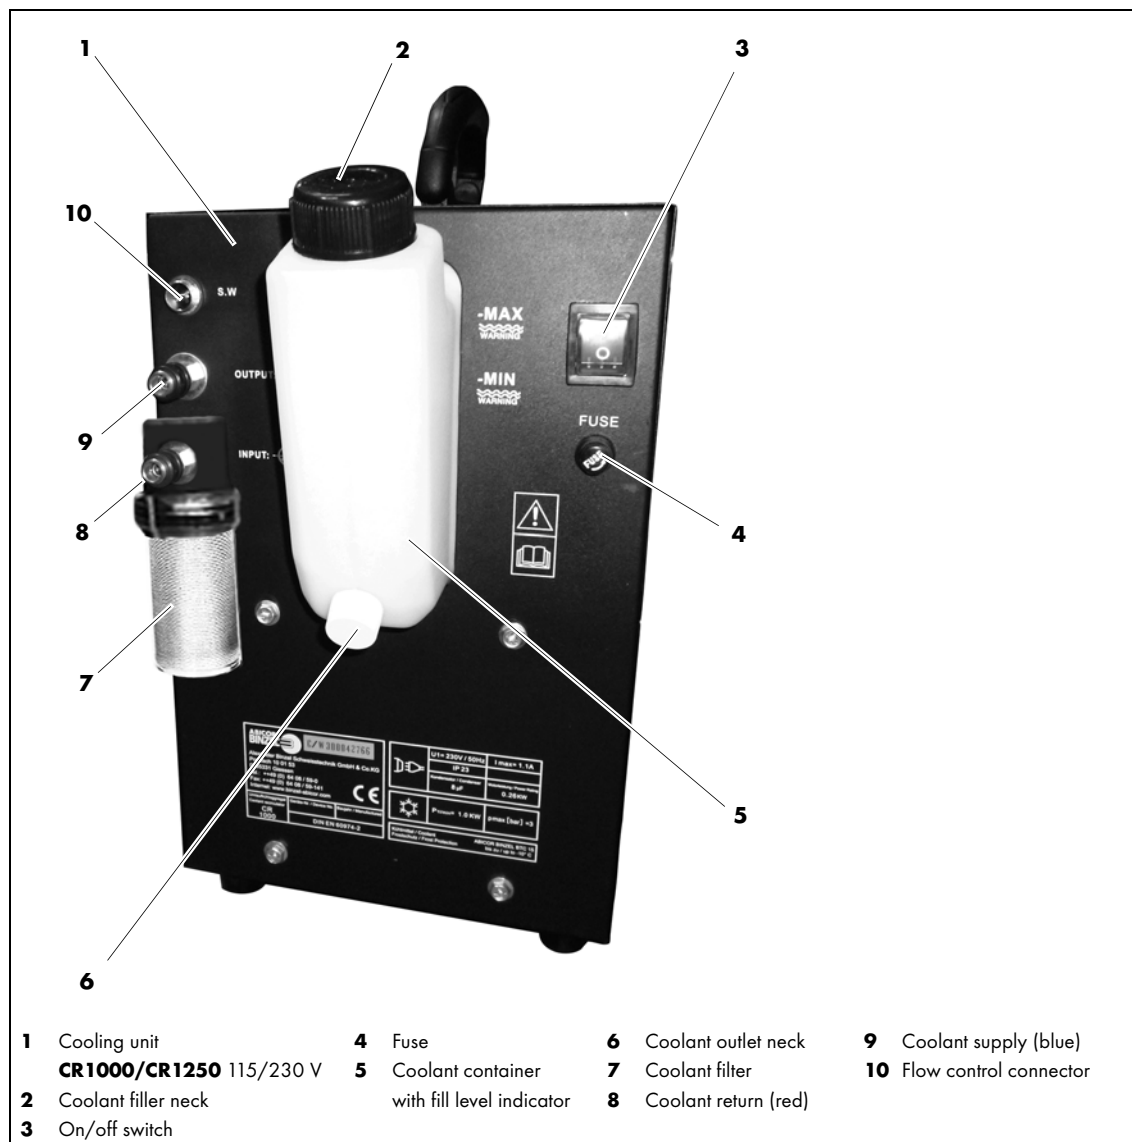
Components of the CR1000/CR1250 115/230 V cooling unit
